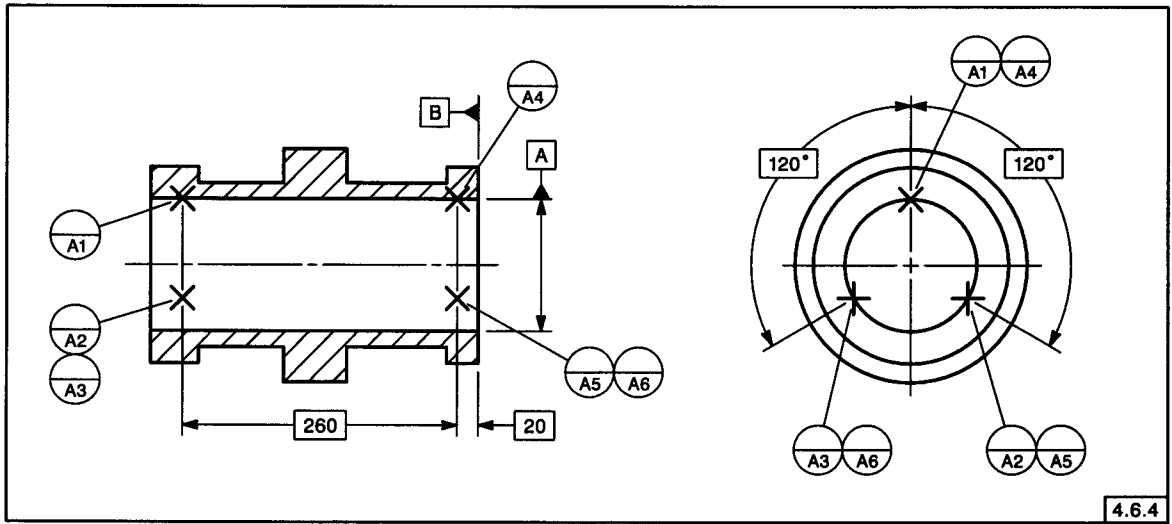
PRIMARY DATUM AXIS ESTABLISHED BY DATUM TARGET POINTS ON A SINGLE CYLINDRICAL FEATURE
